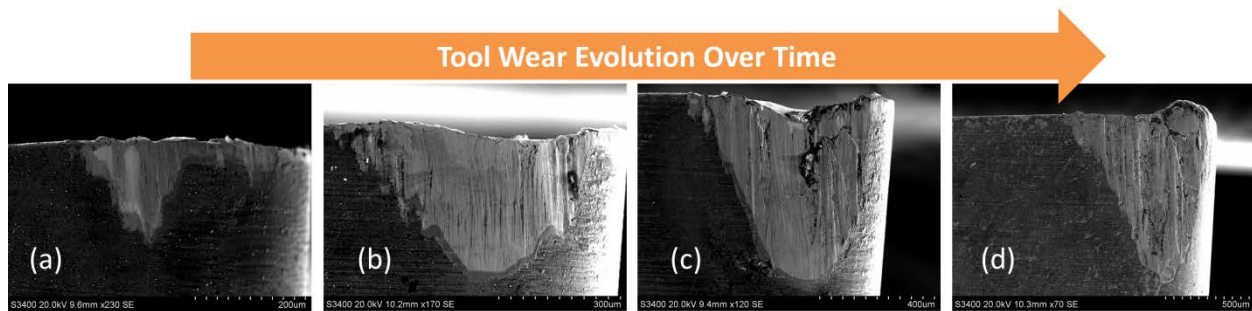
Evolution of tool flank wear for cutting feed of 0.05 mm/rev, cutting speed 80 m/min and depth of cut 0.1 mm, (a) initial wear, (b) 300µm of flank wear, (c) 600µm of flank wear, and (d) 900µm of flank wear
